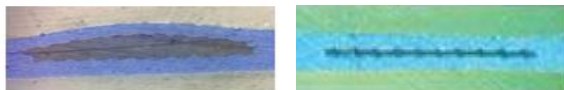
Cross section of a micro heat pipes fabricated in ESL41020. Left; the cavity is swollen and the intended square shape of the wick grooves is rounded. Right; improved result
